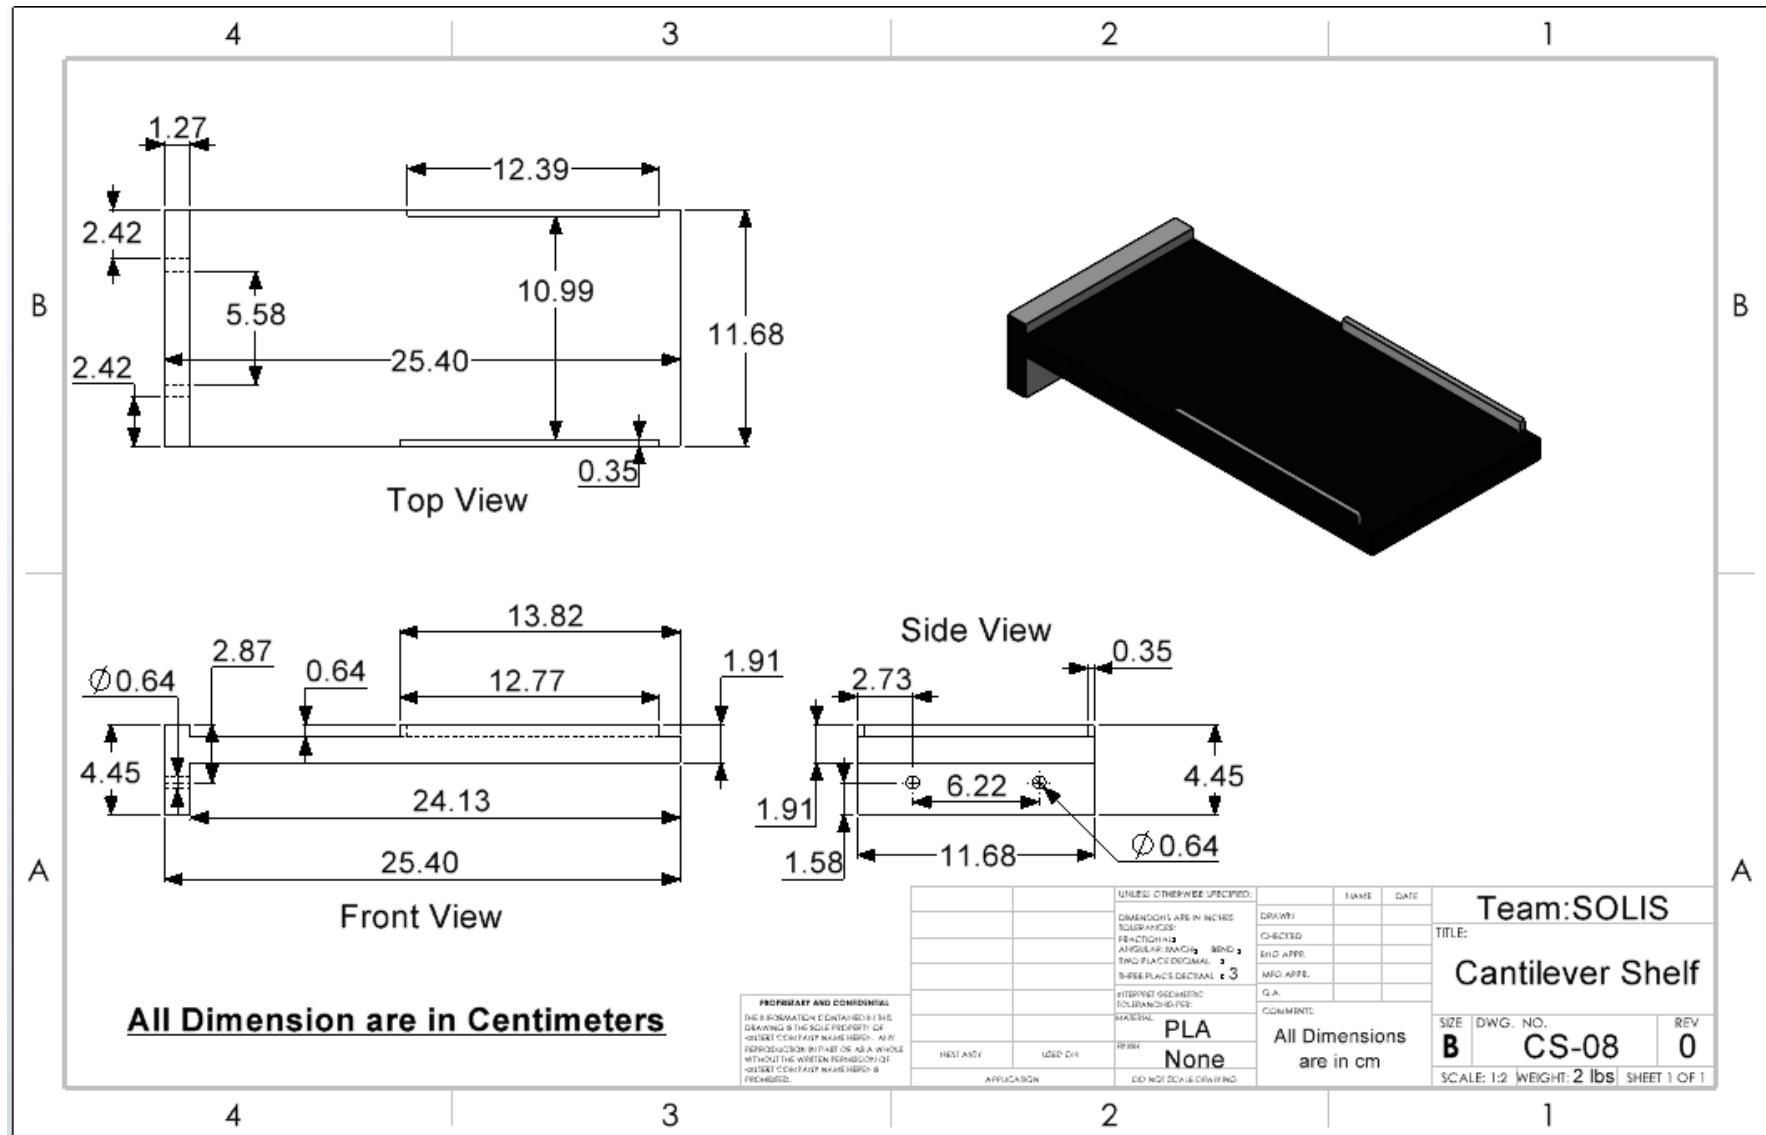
CAD Draft Sheet of the Cantilever Shelf.
